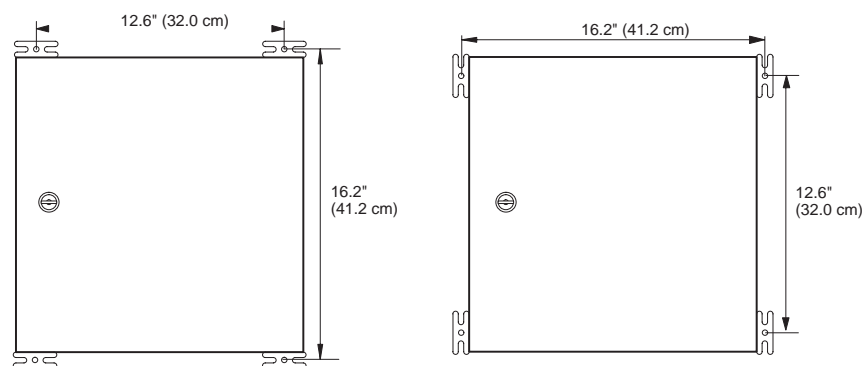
Small NEMA 4 Housing - Installation Dimensions
